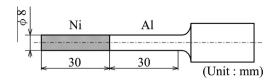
Dimension of pure Ni and pure Al friction weld joint for fracture test.
